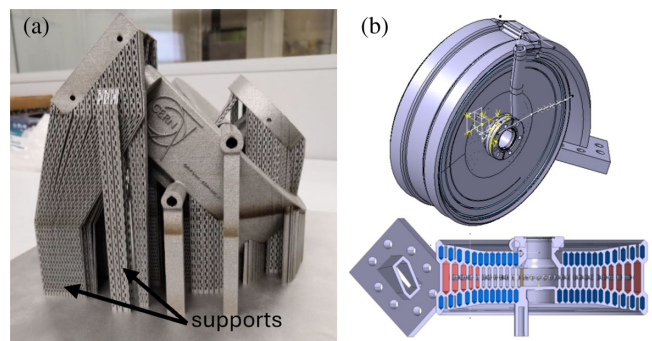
(a) Photograph of additively manufactured spiral rf load showing the supports and (b) CAD model of the novel design developed for mass production [213].
